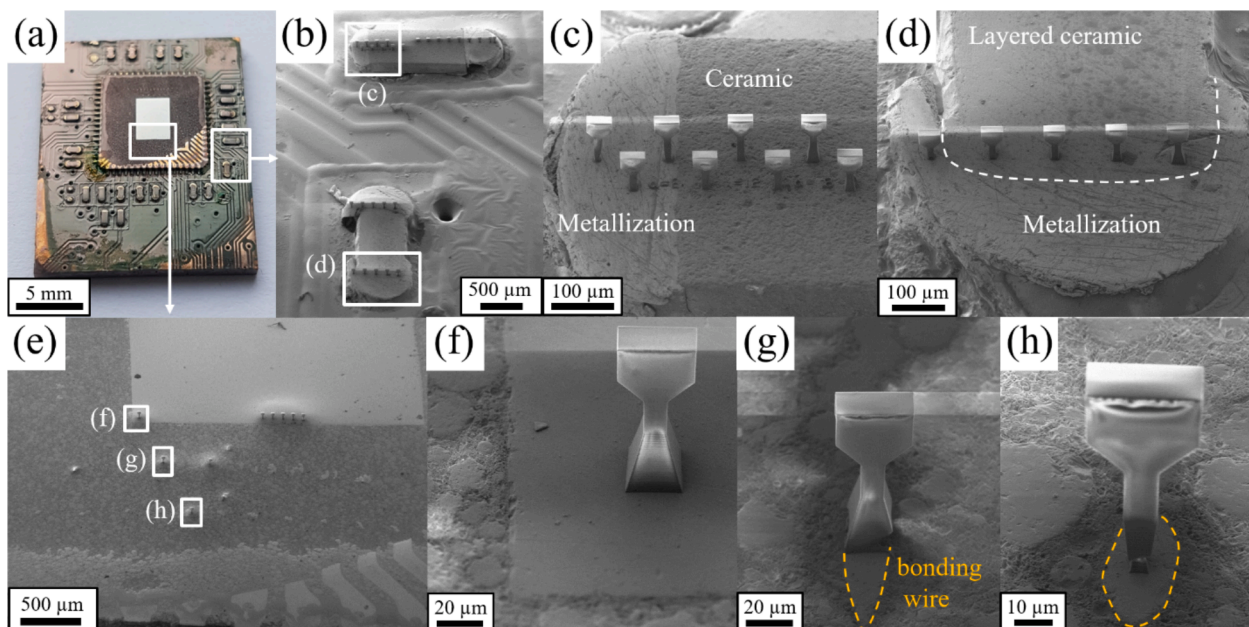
Printed adhesion tension specimen on target positions of a non-specified polished IC chip and surrounding SMD components. (a) Overview, showing the entire PCB (green) with soldered on components, which were grinded to about half original height and used as printing substrate for demonstration reasons. (b) Magnified section on two different polished SMD components bearing multiple specimens each. (c) Two rows of specimens with various footprint areas, with three located on a metallized part of the SMD and the remaining specimens on the ceramic part. (d) Various adhesion specimens close to the ceramic/solder-interface of a on a differently orientated SMD than in (c). (e) Zoomed-in section of a different part of the polished chip, selected as printing position. (f) Individual specimens on the heat sink metallization of the IC. (g),(h) Adhesion specimens printed to cross-sections of bonding wires with $\sim 20 \mu\text{m}$ diameter, for demonstration of targeted specimen printing.
